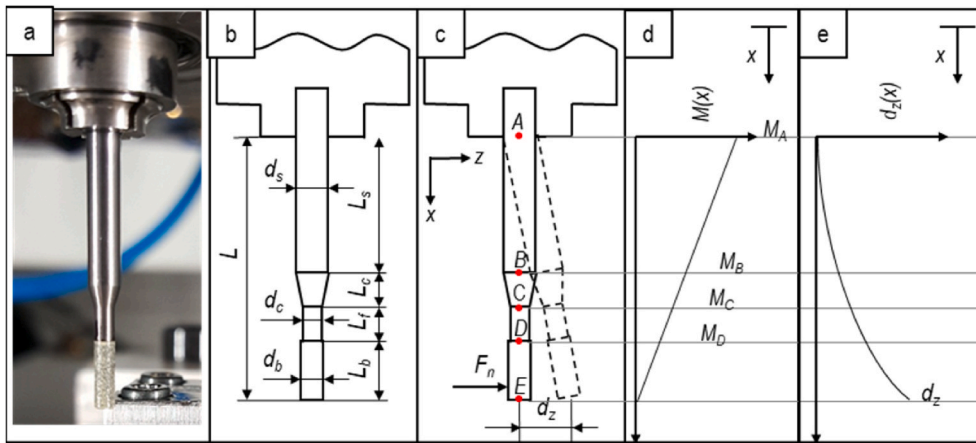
Tool deflection model of micro-grinding tool a) micro-grinding tool, b) schematic of micro-grinding tool specification, c) schematic of micro-grinding tool deflection, d) Bending moment diagram, e) Deflection diagram.
